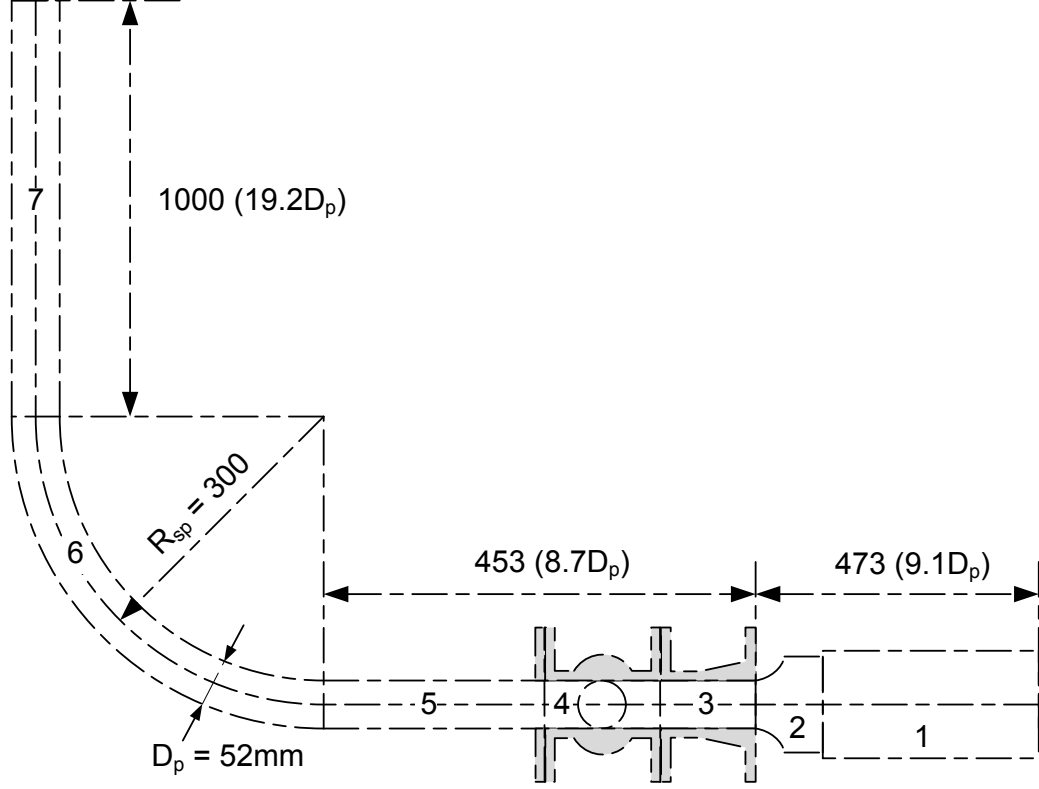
Nozzle supply-pipe centerline dimensions given in *mm* and pipe diameters. 1. Test fluid cylinder, 2. Cylinder end cap, 3. Outlet flange adapter, 4. Full-bore pneumatic ball valve, 5. Pre-bend straight, 6. 90° bend, 7. Post-bend straight
